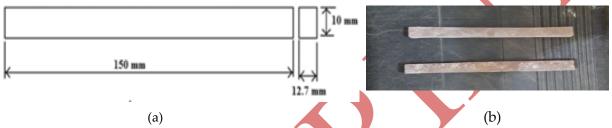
(a) Design specimen standard ASTM D790 and (b) result of specimen fabrication.
